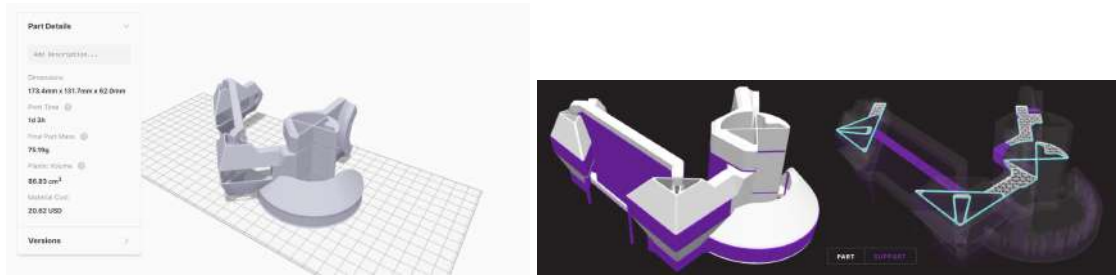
Build strategy. The figure shows the overall view of the divided part (top) and a sliced view (bottom) in the Markforged Eiger slicing software. Notably, the bottom-right detailed layer view demonstrates that the flexures are support-free, which is a key aspect of the design.
